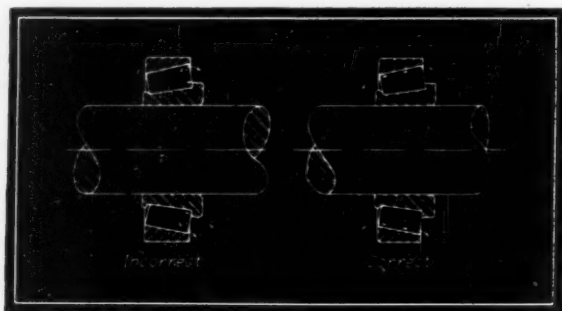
Oil should be introduced at smaller end of roller bearings, as indicated by arrows
